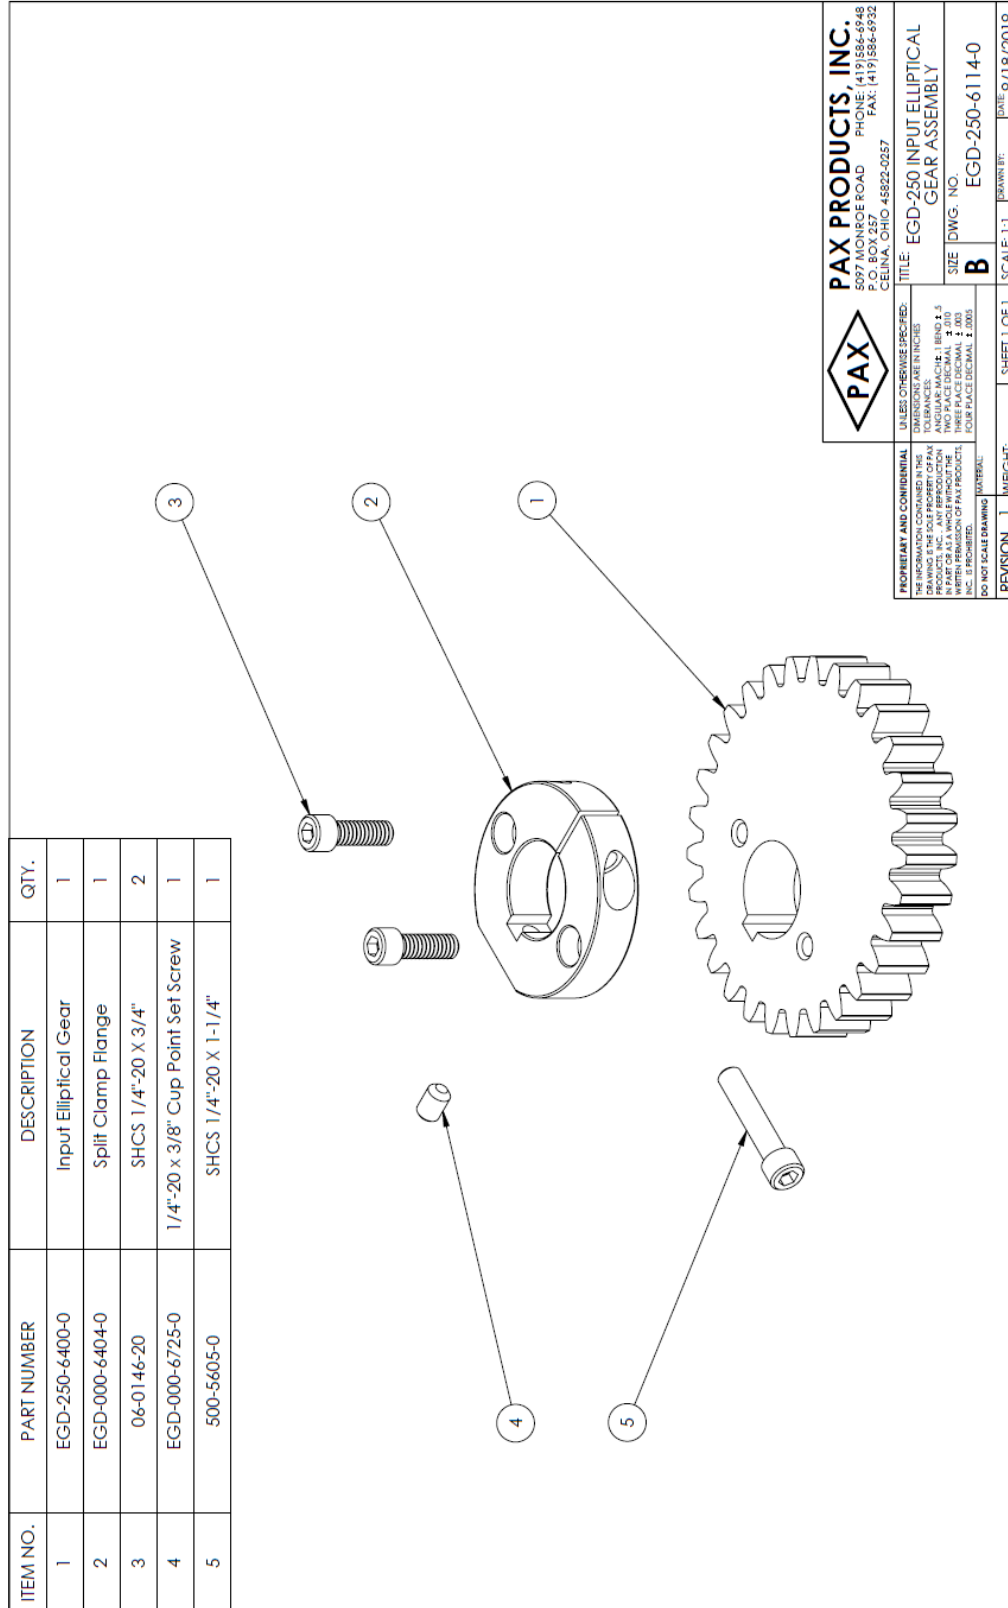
EGD-250 INPUT ELLIPTICAL GEAR ASSEMBLY
